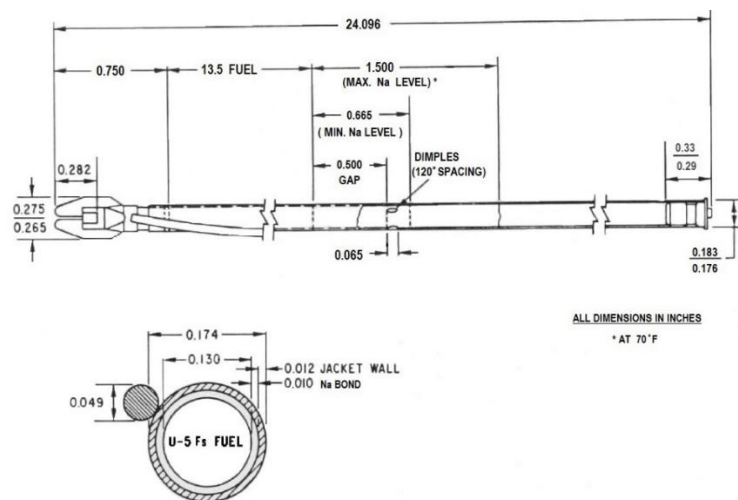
EBR-II Mark-II Driver Fuel Pin [2].
